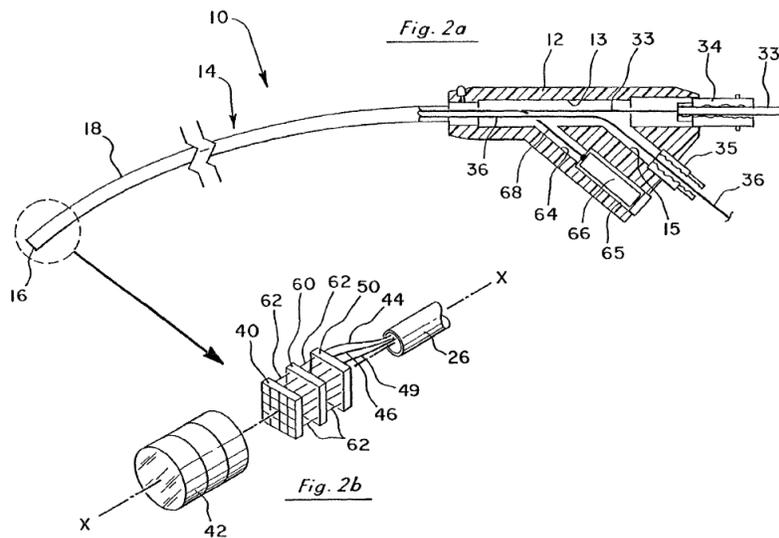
shows a fragmentary cross-sectional view of the same endoscope shown in Fig. 1a but with a different arrangement of the imaging device at the distal end of the endoscope. *Id.* at 7:44–47. Fig. 2b is a fragmentary partially exploded view of
